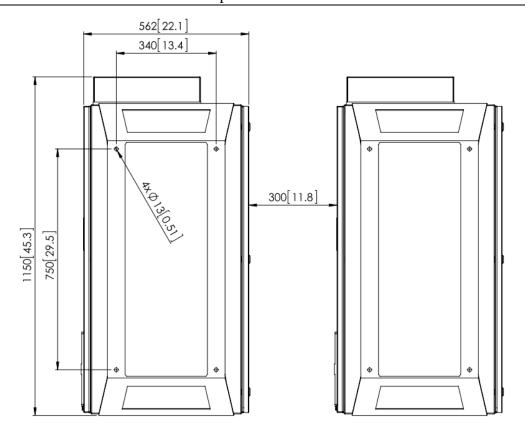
Mounting Holes & Spacing, Bridge-Mounted Unit
